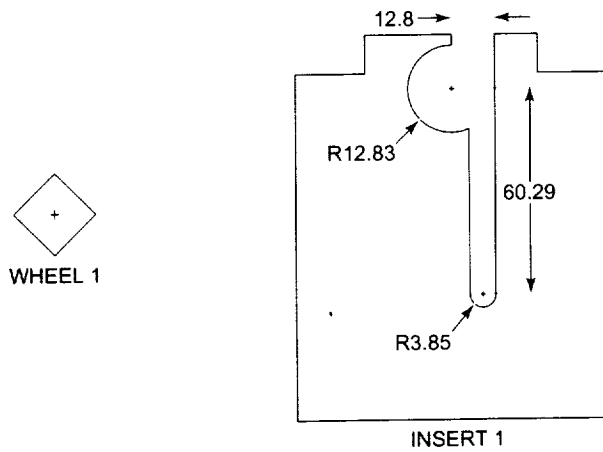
Insert 1 and Wheel 1 (dimensions in mm).
